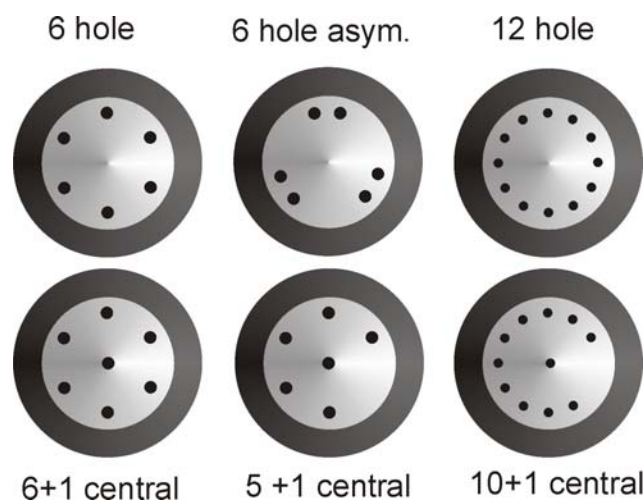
Schematic drawing of possible multi-hole injector nozzle configurations
